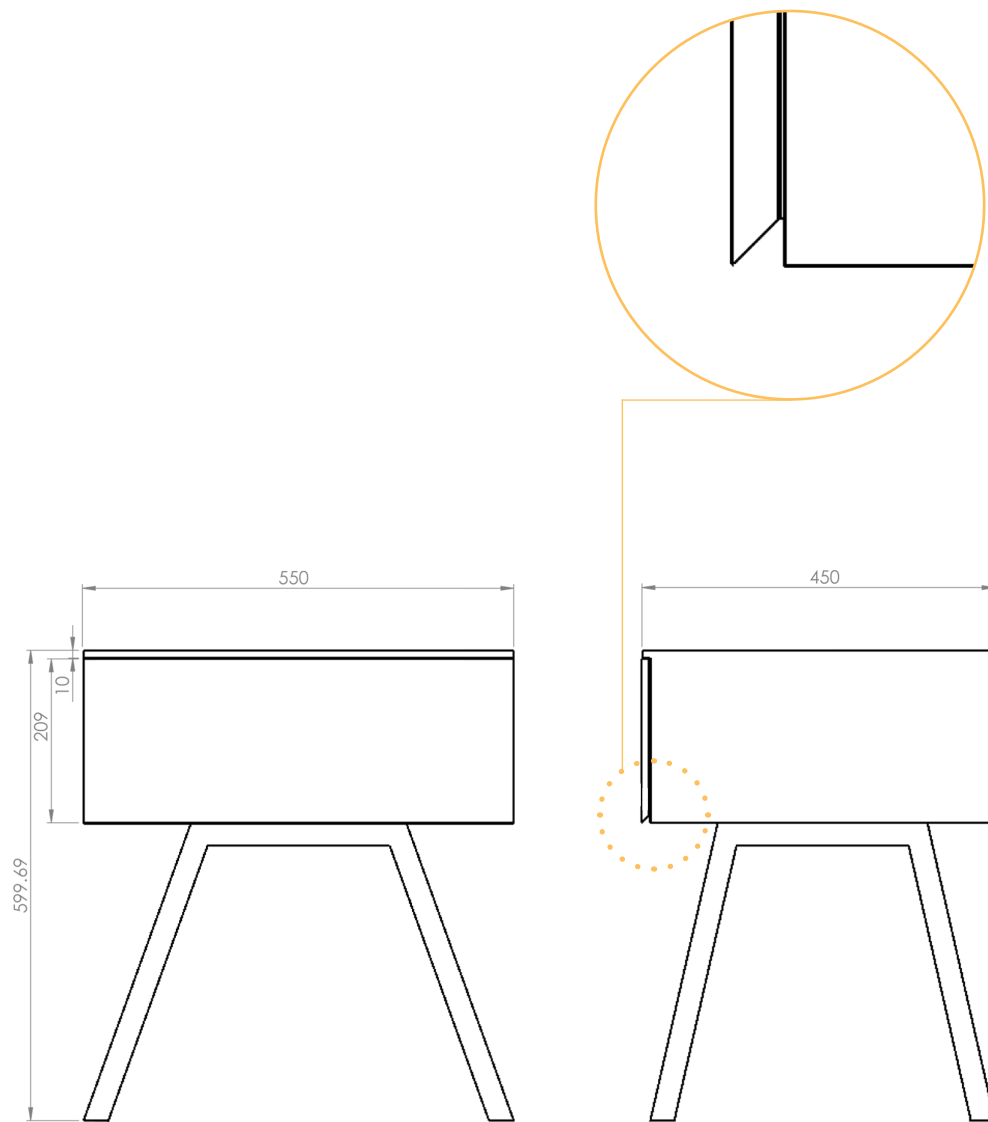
Barry's Sleeve Details. Front & side view showing the overall structure and size of the sleeve. Close-up section shows the drawer edge detail.
